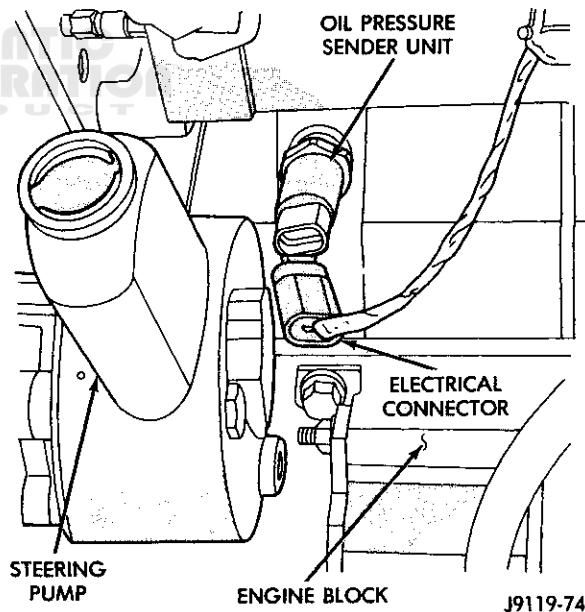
Oil Pressure Switch/Sending Unit - Diesel Engine
